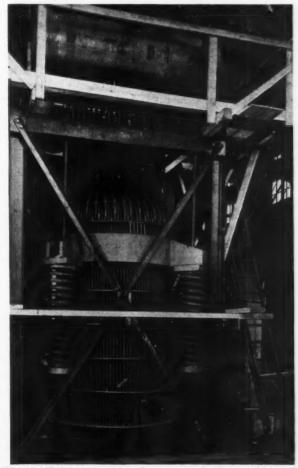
Tube assembly of mercury boiler at Pittsfield
